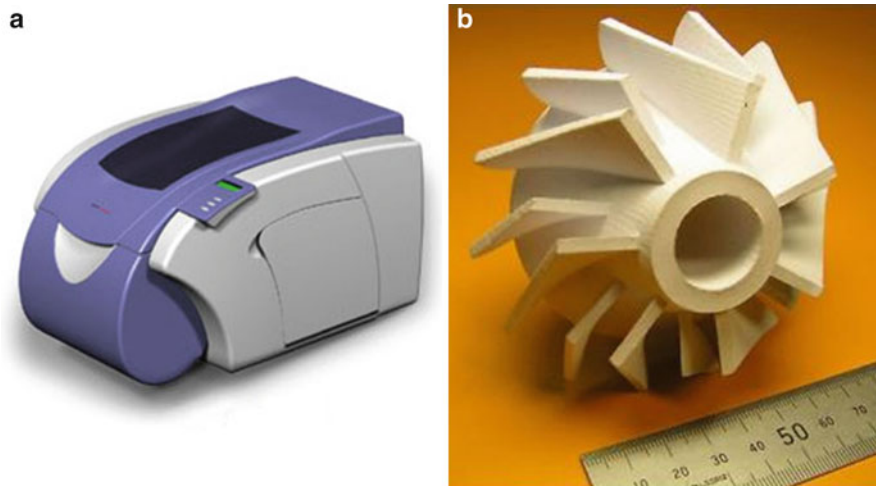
(a) Photo of a LOM 3D printer (model Solidimension SD300; size: 450 mm × 725 mm × 415 mm). (b) An object made of paper printed using the LOM method
